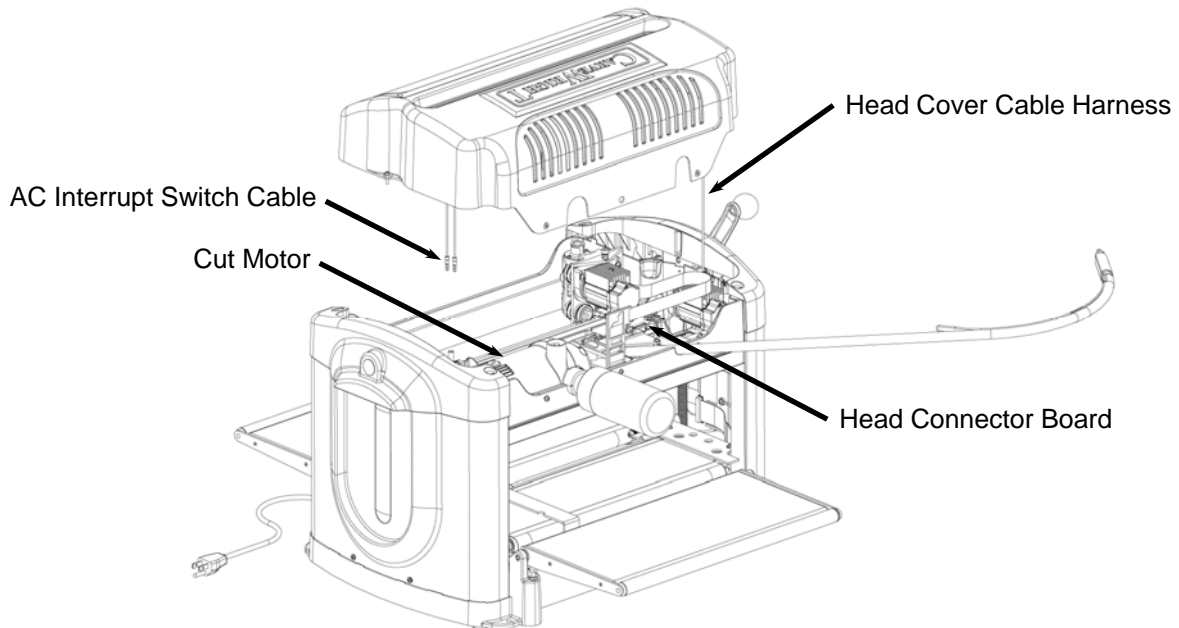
EXPLODED VIEW OF THE LIFTED COVER
